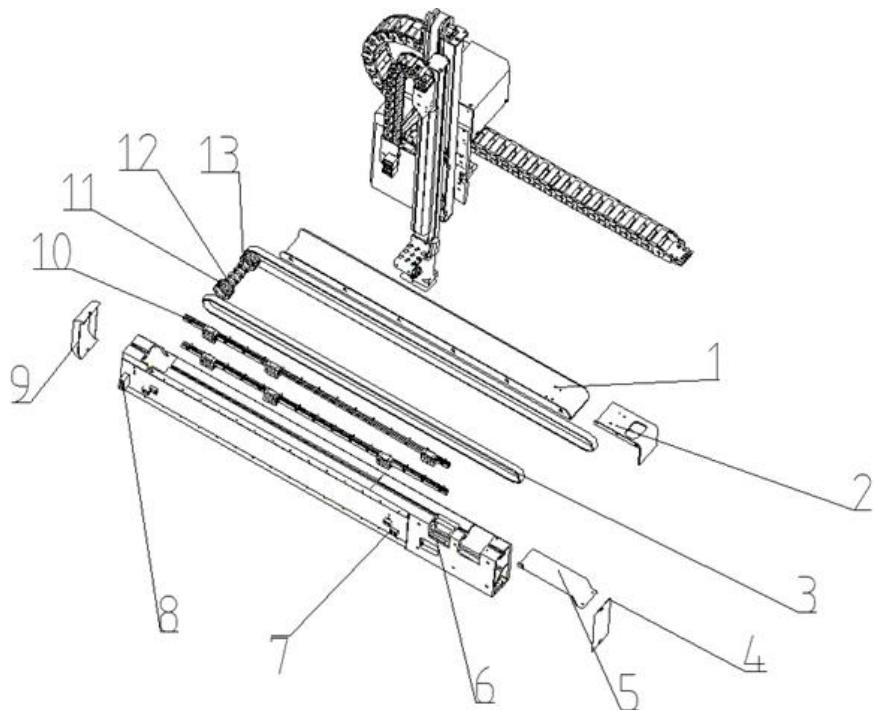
ST3-T Crosswise unit (telescopic arm) exploded view
